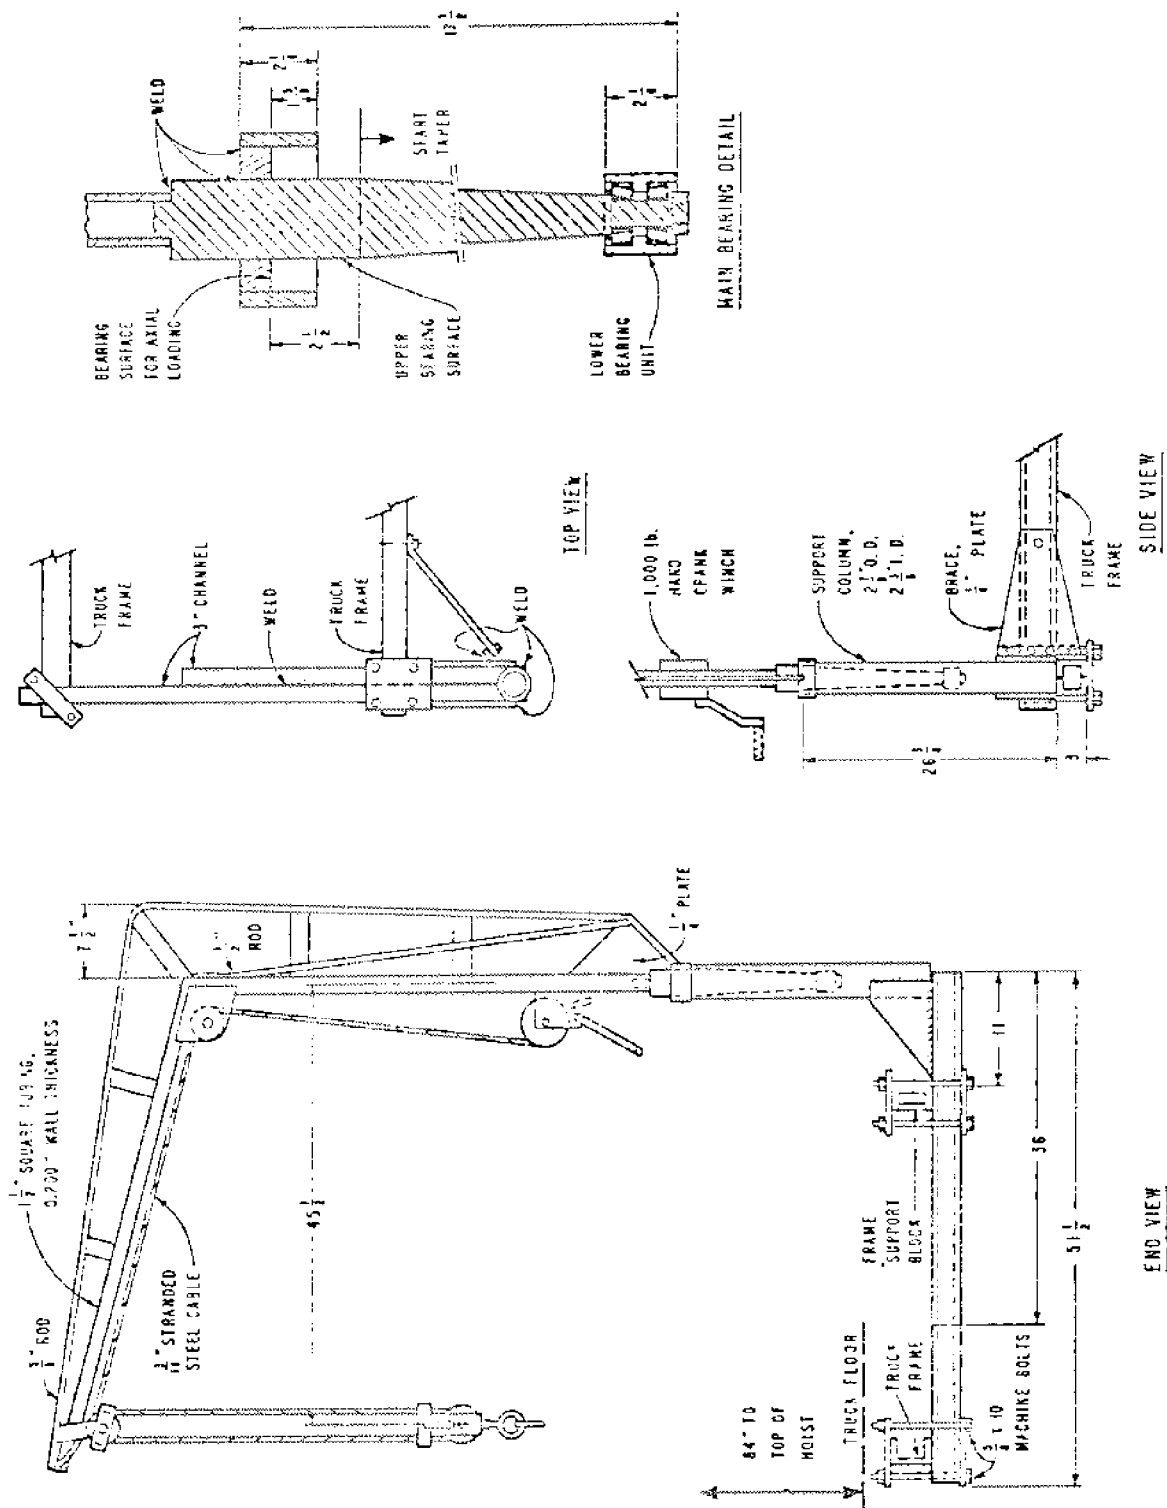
Hoist designed and constructed to fit the pickup truck for the purpose of handling test equipment.
